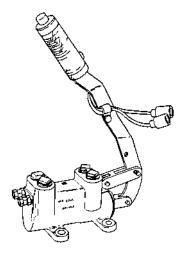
Location of Major Components, Assemblies, and Auxiliaries (Sheet 4 of 8).
